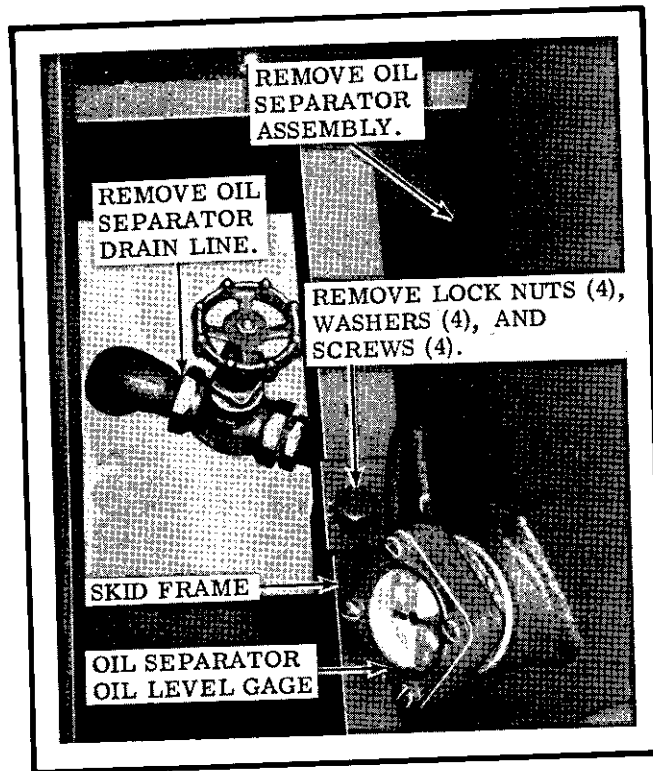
Compressor Oil Separator Assembly, Removal and Installation
